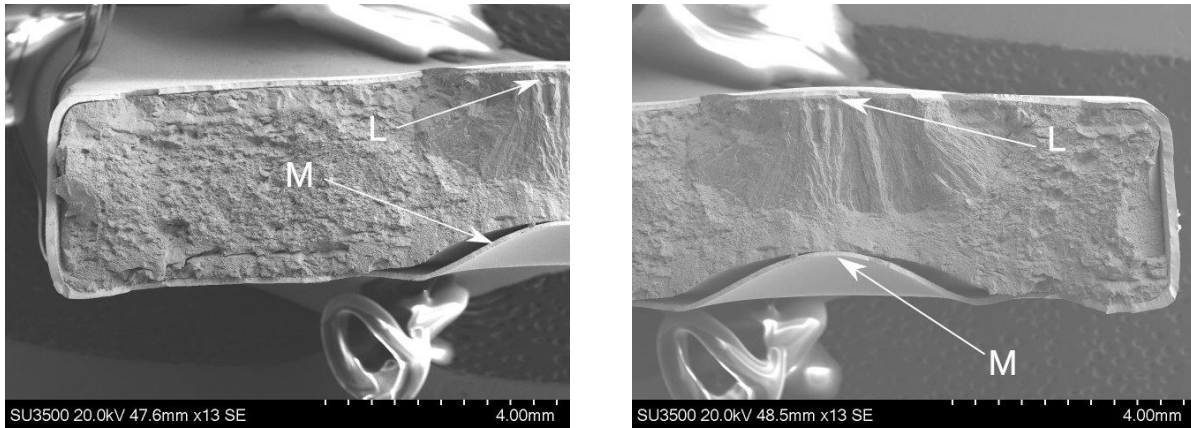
Detail view location J on fracture surface of specimen H13.
